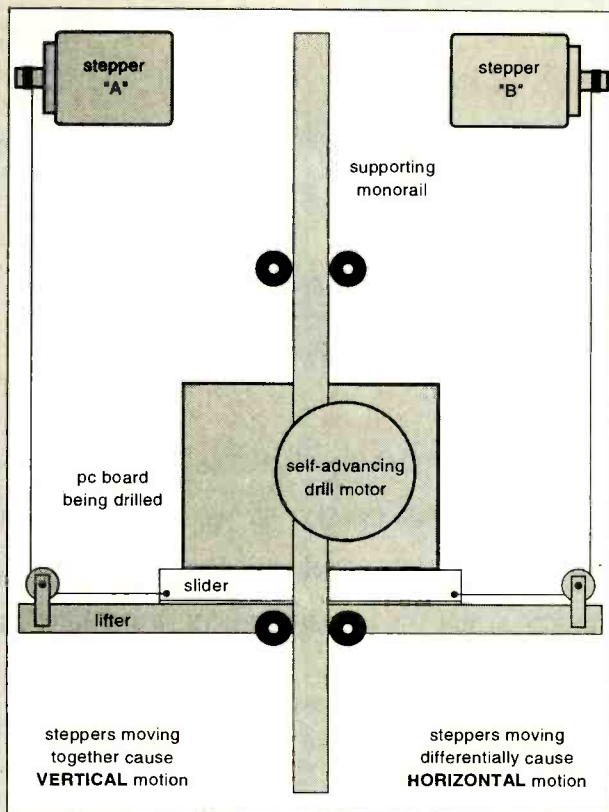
THIS NEW PCD100 PRINTED CIRCUIT DRILL is largely gravity powered! Differential stepper motions move a PC board under a fixed self-advancing drill or a plotting pen.
